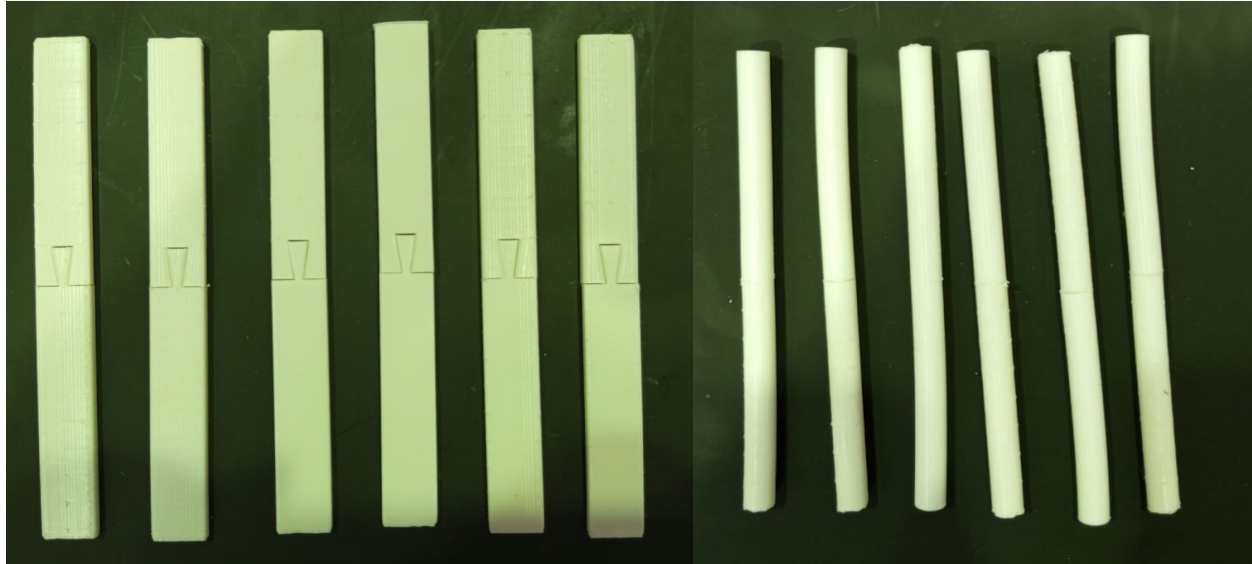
The actual printed flat dovetail and round screw PLA segments after joining.
